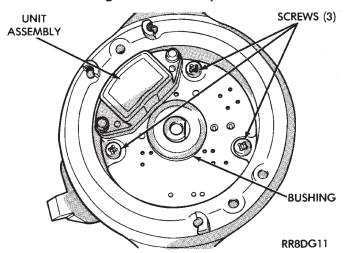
Photo Optic Sensing Unit Assembly and Bushing
